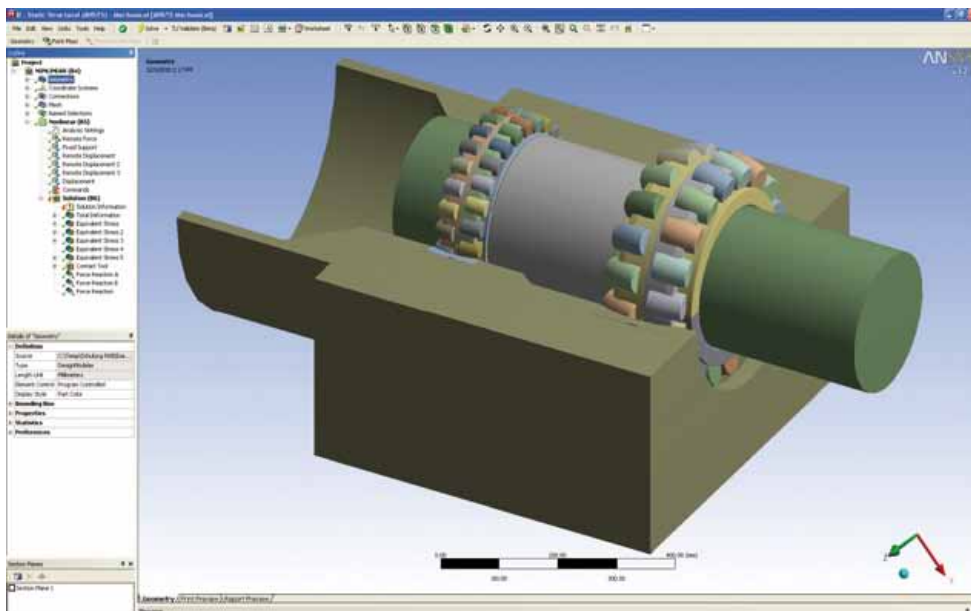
3D model of the assembly imported from CATIA to ANSYS.
